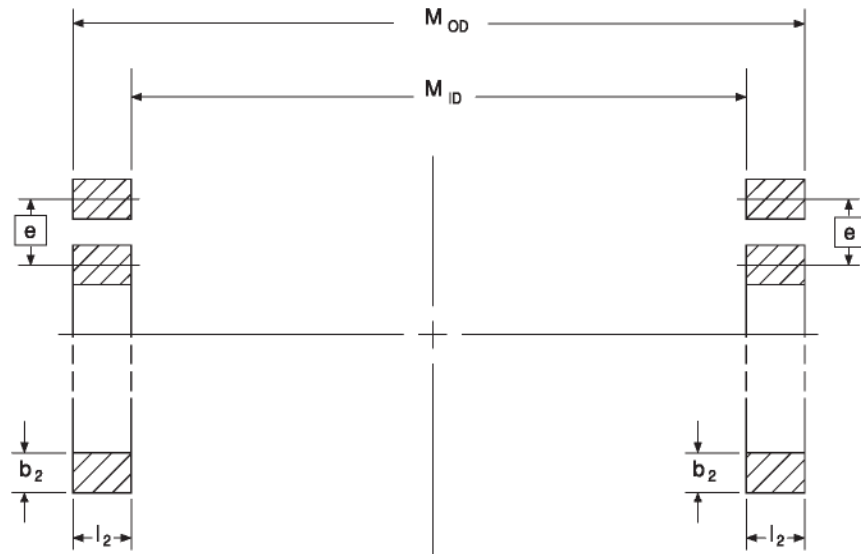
IPC Standard Board Layout of Soldered Pads for TSOP/TSSOP Packages
